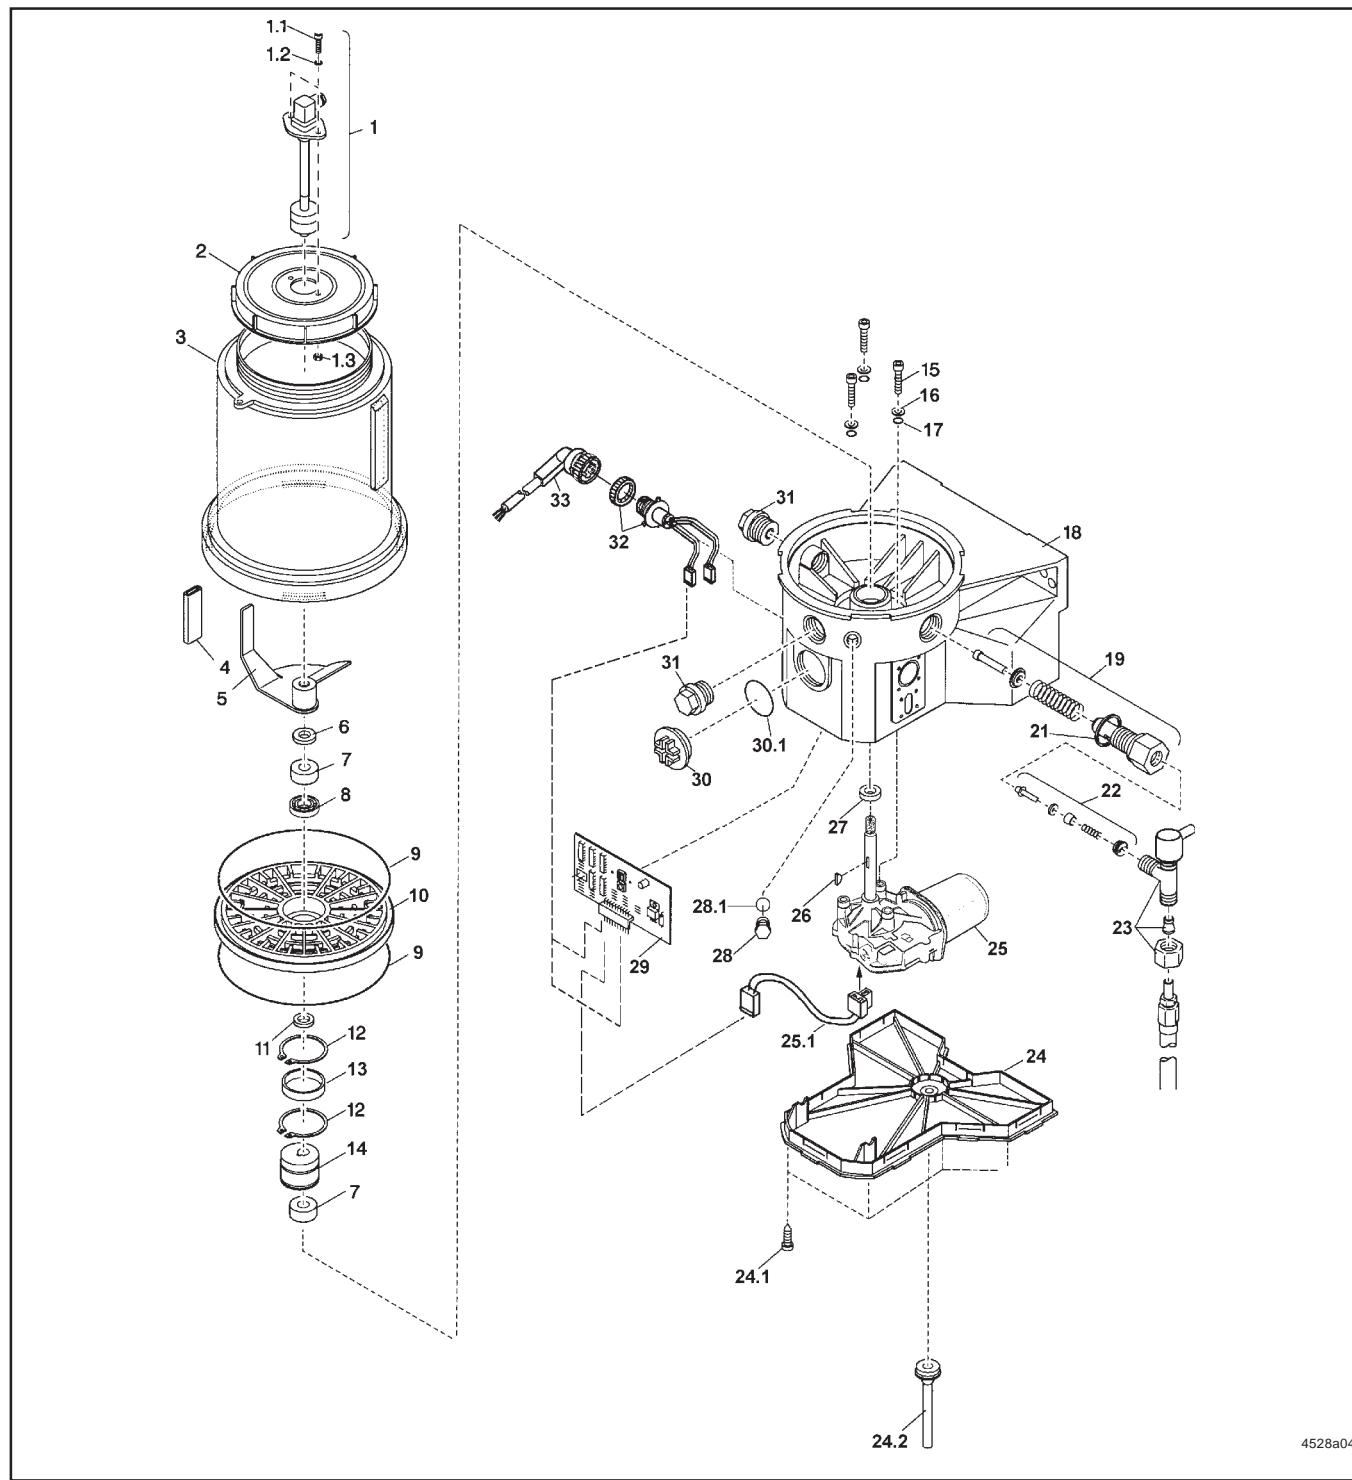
Explosion view for P 203 -2YLBO-K.-12/24-1A7.16-V 10 - V13, V20 - V23
